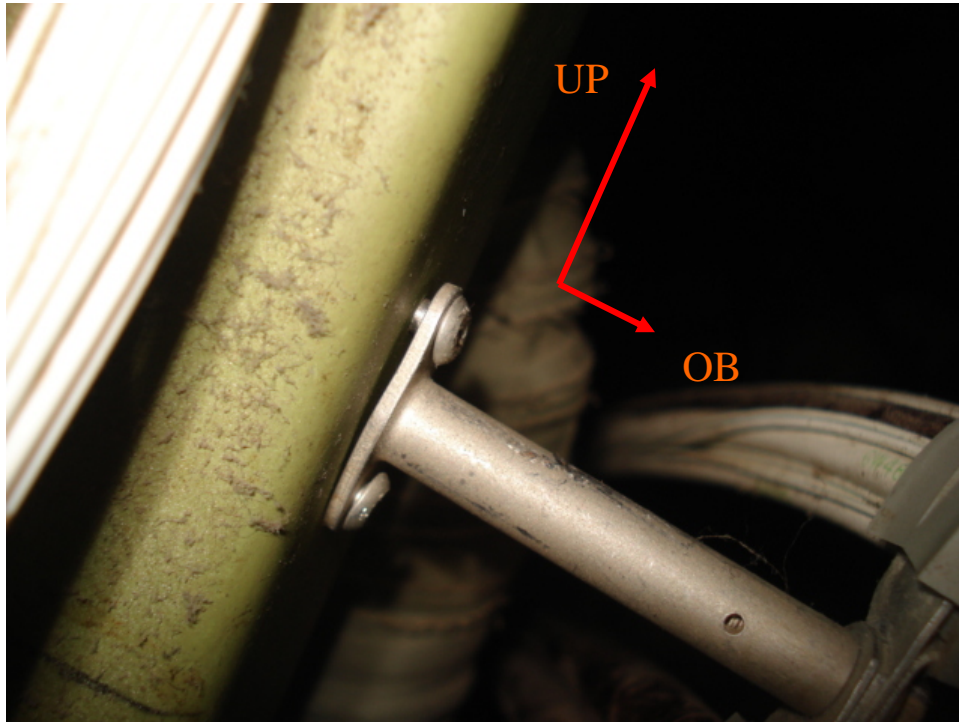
Similar Case Found in Fleet Wide Inspection
